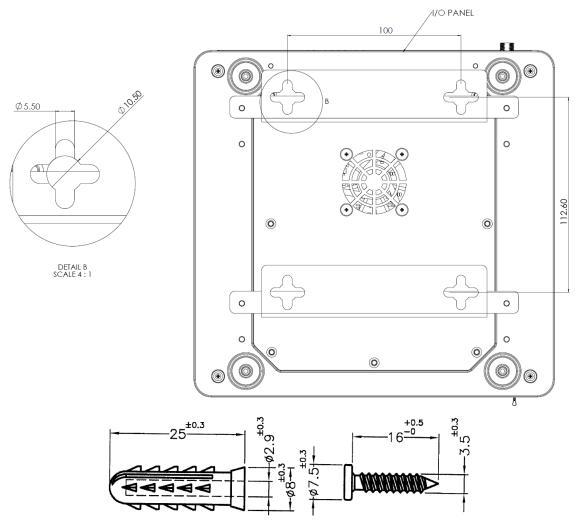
VEP1405 series wall mount, installation anchor, and screw dimensions
